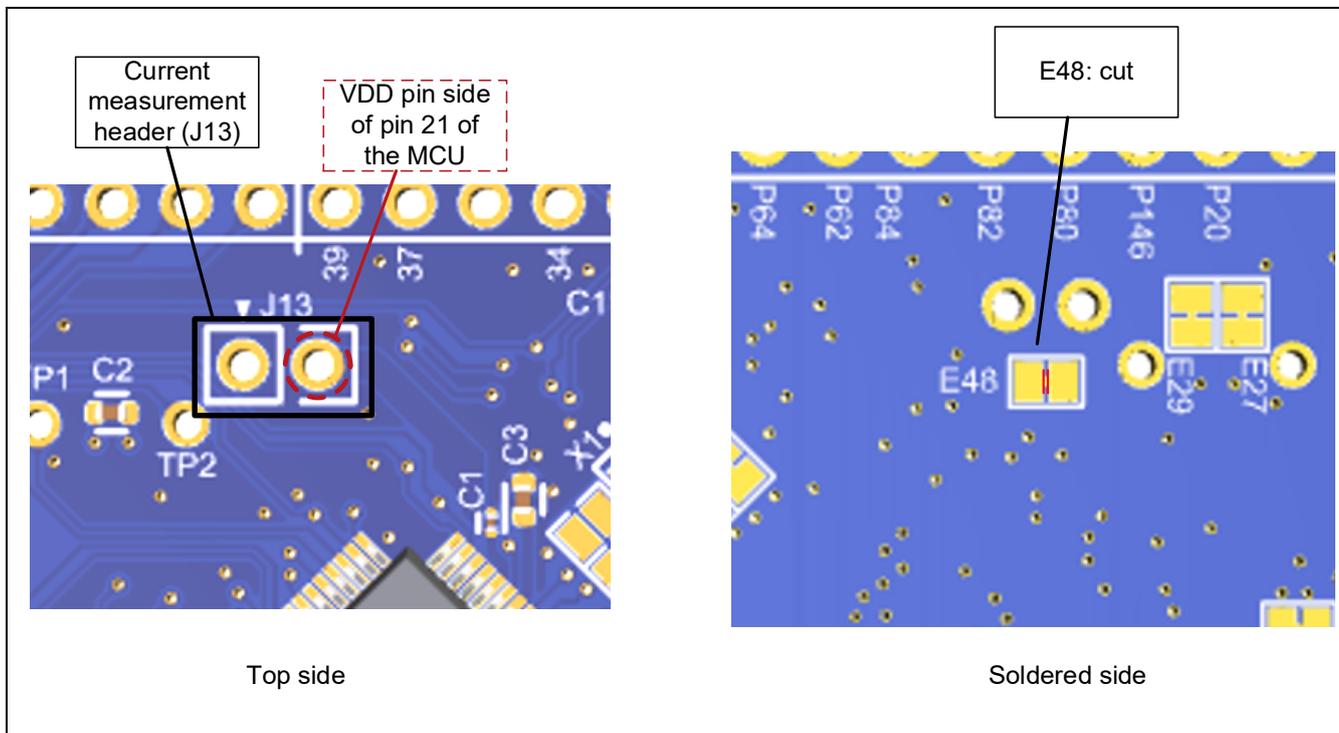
Positions of the Current Measurement Header (J13) and Jumper Trace Cut E48
